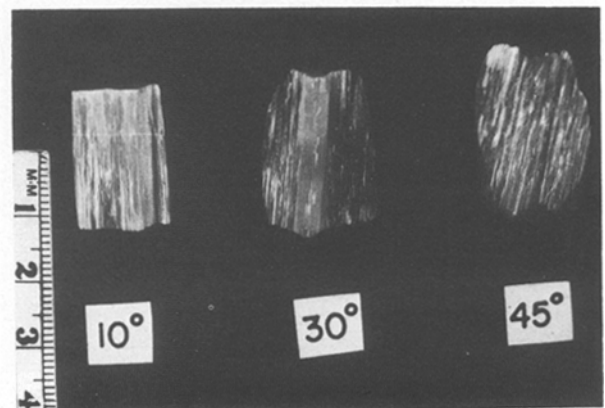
Failed surfaces of 10, 30 and 45° specimens.
